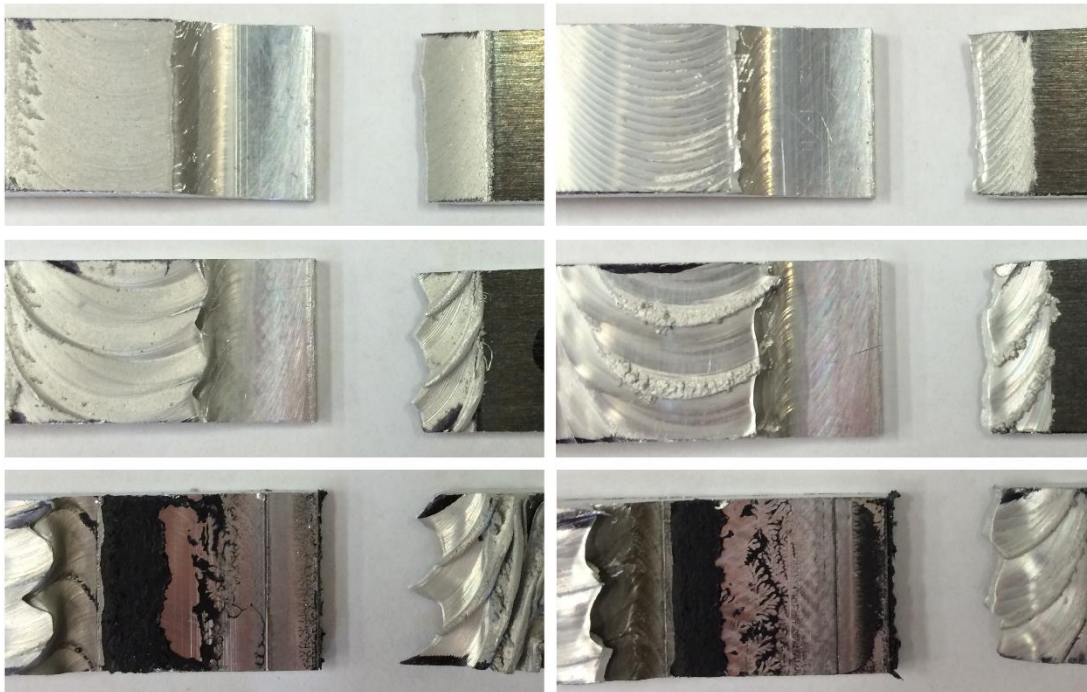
Tension-Shear Fracture Surfaces in the Tracking Regime; Conventional, Weaving at R = 0.040 inch, and Weaving at R = 0.040 inch with Sealant (From Top to Bottom); Flat Shoulder Tool (Left) and Tapered Shoulder Tool (Right)
